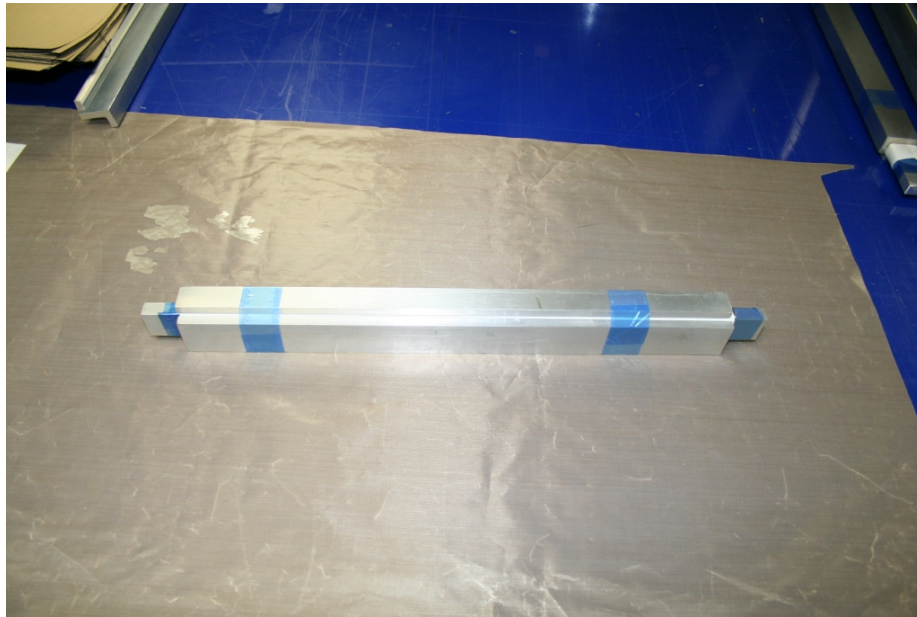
Full Fabric, Resin, and Mandrel Assembly
